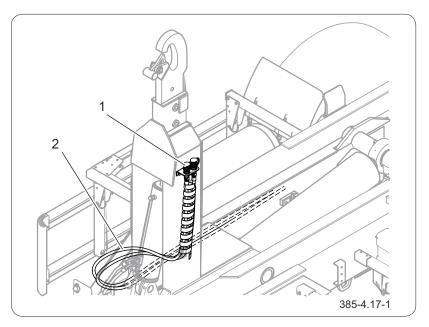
Hydraulic outputs on the hook (1) quick coupler - socket (2) hydraulic hose
